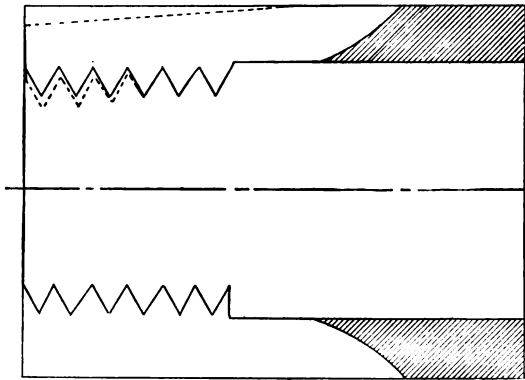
Distortion of Thread Form in Spring Screw Dies of Usual Design when Adjusted
